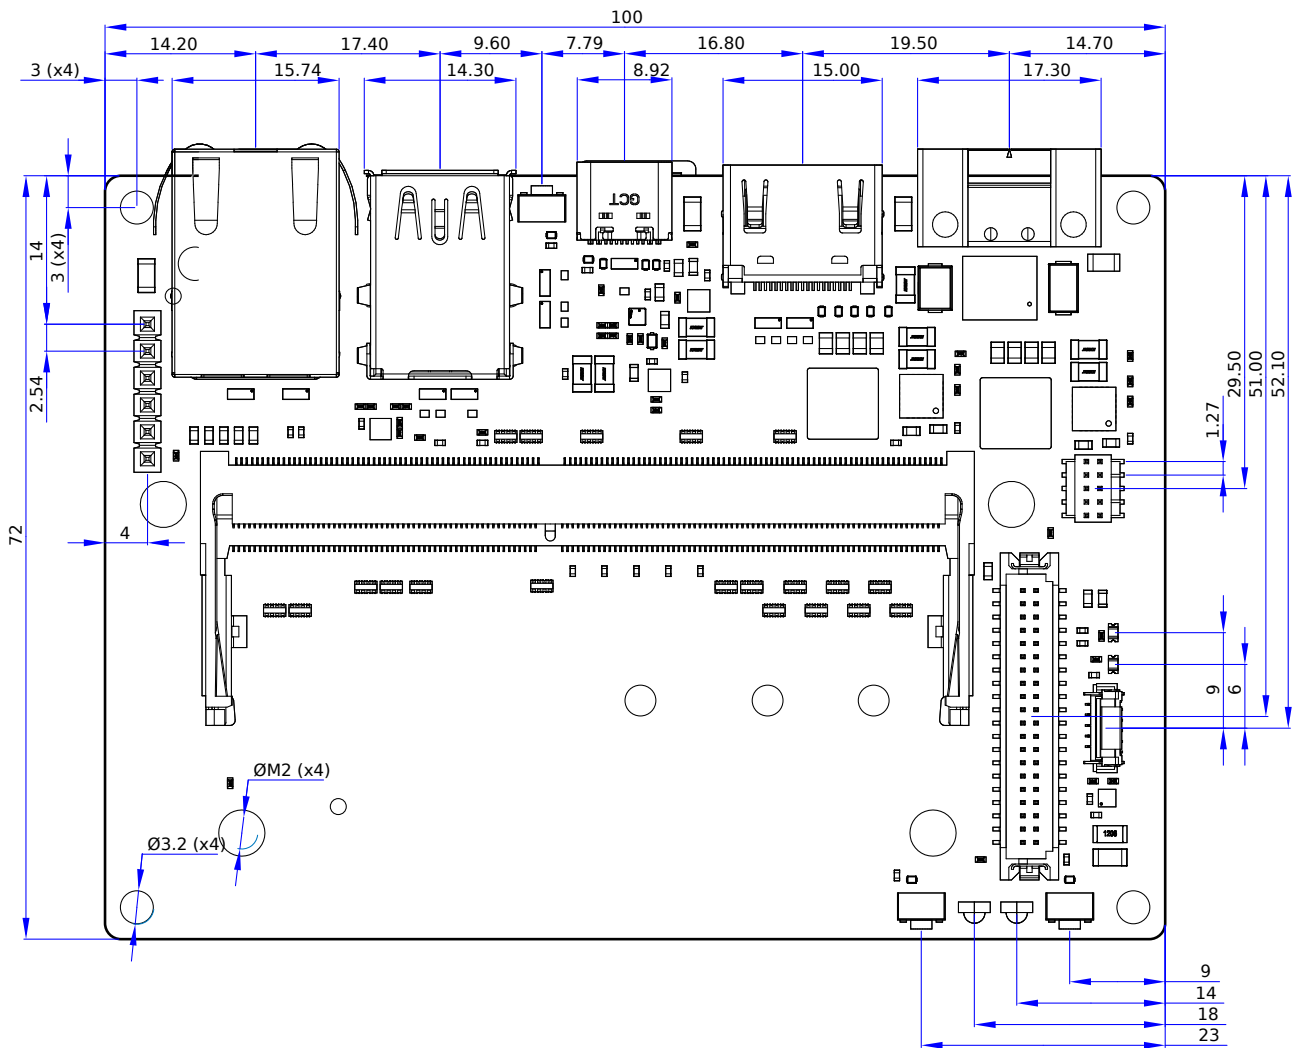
Mallow Carrier Board dimensions (in millimeters) - top side (top view)
